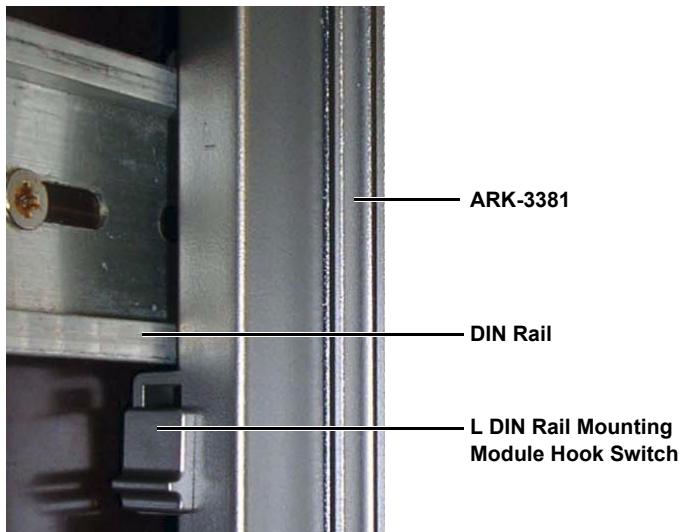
Setting the L DIN Rail Mounting Module Hook Switch
